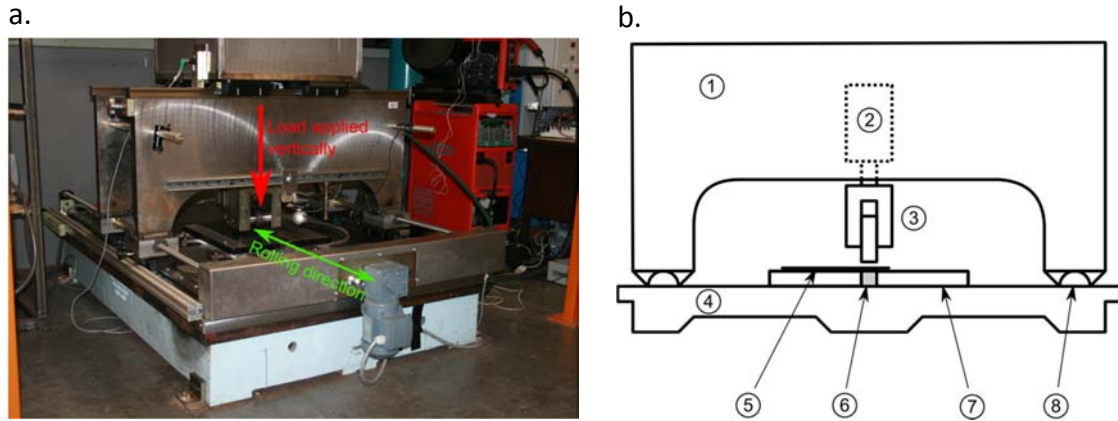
Experimental machine for single-sided rolling. 1. Crossbeam 2. Hydraulic cylinder 3. Roller fork 4. Bed 5. Workpiece 6. Backing bar 7. Vacuum clamps 8. Leadscrew. See Appendix A for further details.
